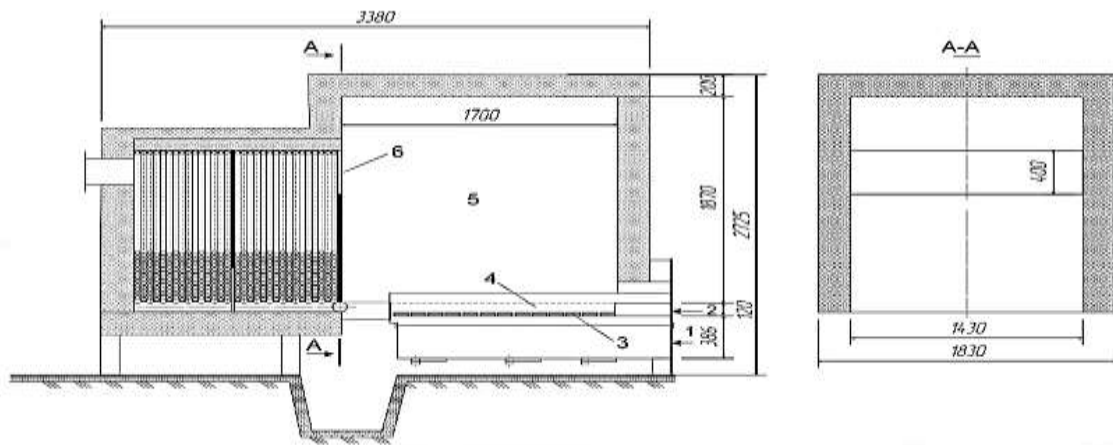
Boiler KVM-12: 1 – air inlet; 2 – solid fuel inlet; 3 – grate; 4 – layer of fuel; 5 – fire chamber; 6– combustion outlet
